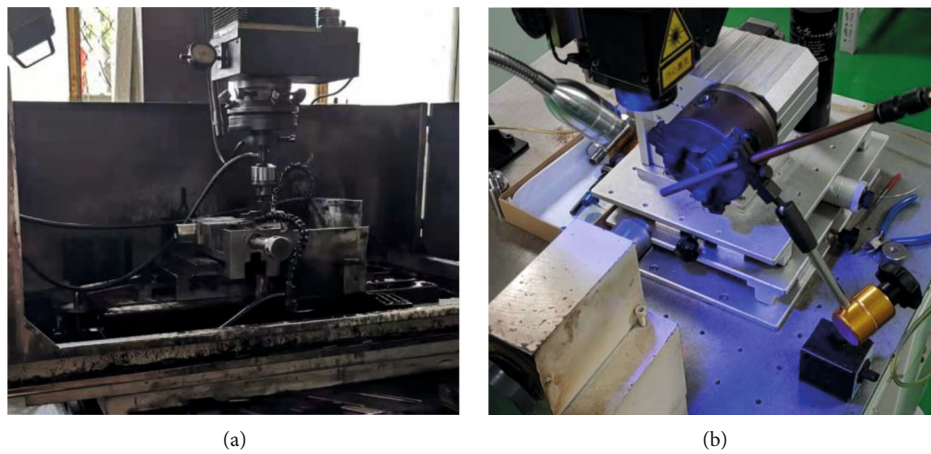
Fault machining equipment: (a) EDM; (b) laser welding machine.
